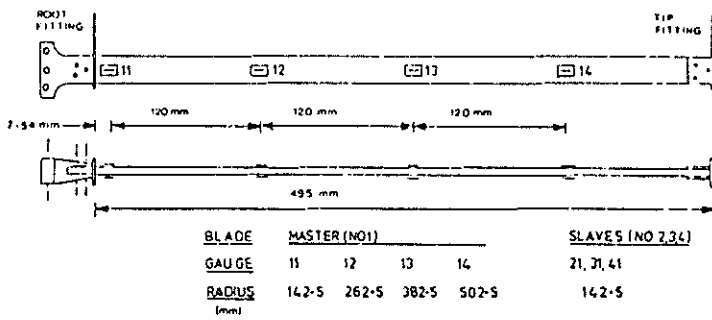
MASTER BLADE SPAR - STRAIN GAUGE LAYOUT.
